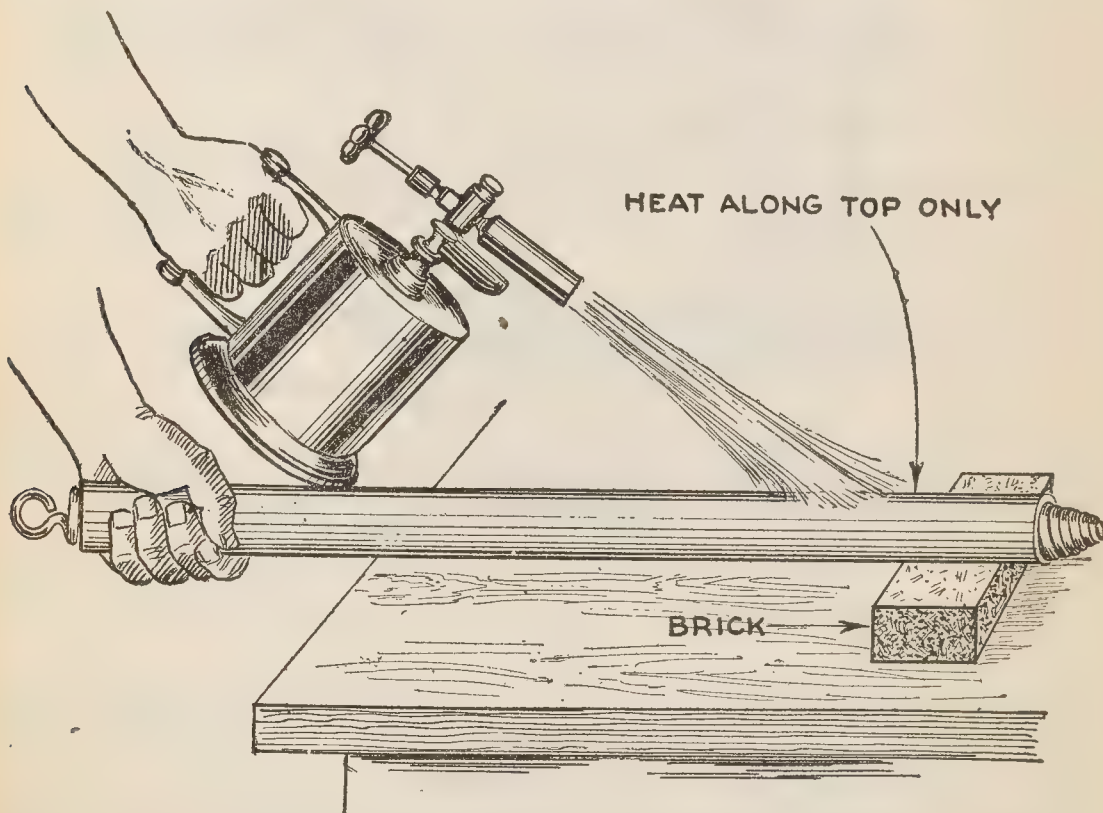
,510.—*Bending with spring, 2.* Heating the pipe on throat side to counteract the distortion in metal due to stresses in bending.
